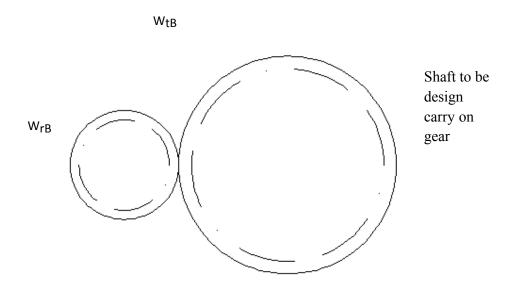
Pinion drive gear and show the force exert on the gear.
